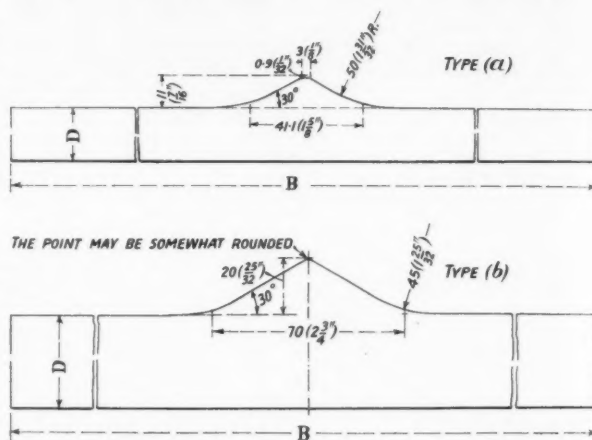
Triangular-boss rolled sections for use in welded structures (see Table 1 for dimensions)
